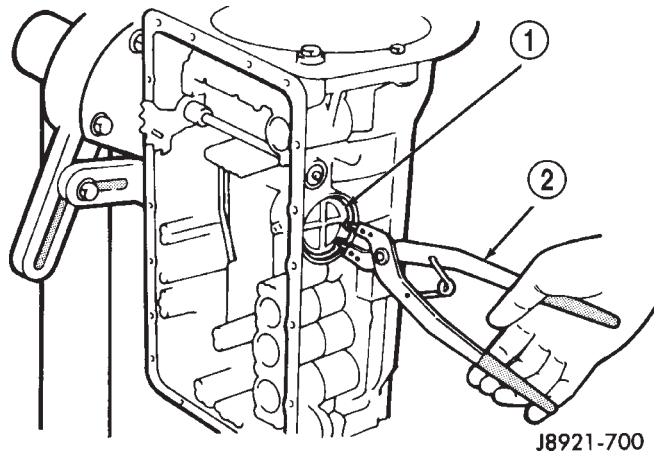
Installing Second Coast Brake Piston Snap Ring
